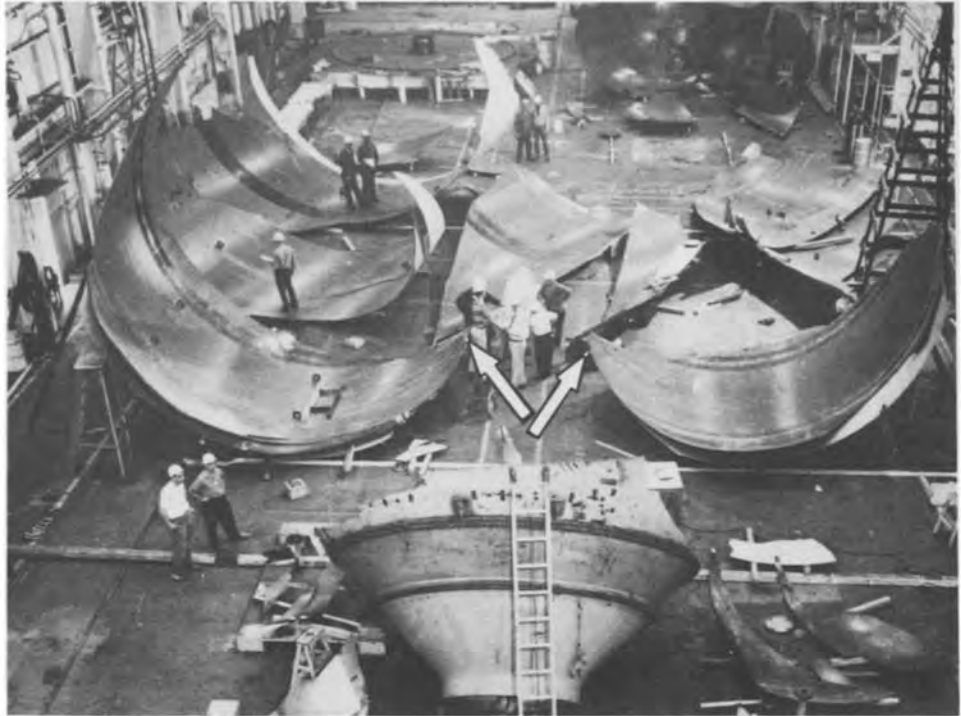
(a) Catastrophic brittle fracture of a 260 in. diam solid-propellant rocket motor case made of 18% Ni, grade 250, maraging steel. The case fractured at a repaired weld imperfection during a hydrostatic pressure test. Fracture occurred at about 57% of the intended proof stress. All welds of the case had been carefully inspected by X-ray and ultrasonic inspection. Arrows indicate origin of fracture.
